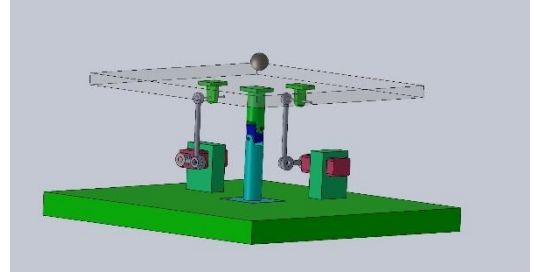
3D CAD Drawing for Ball-on-Plate System
